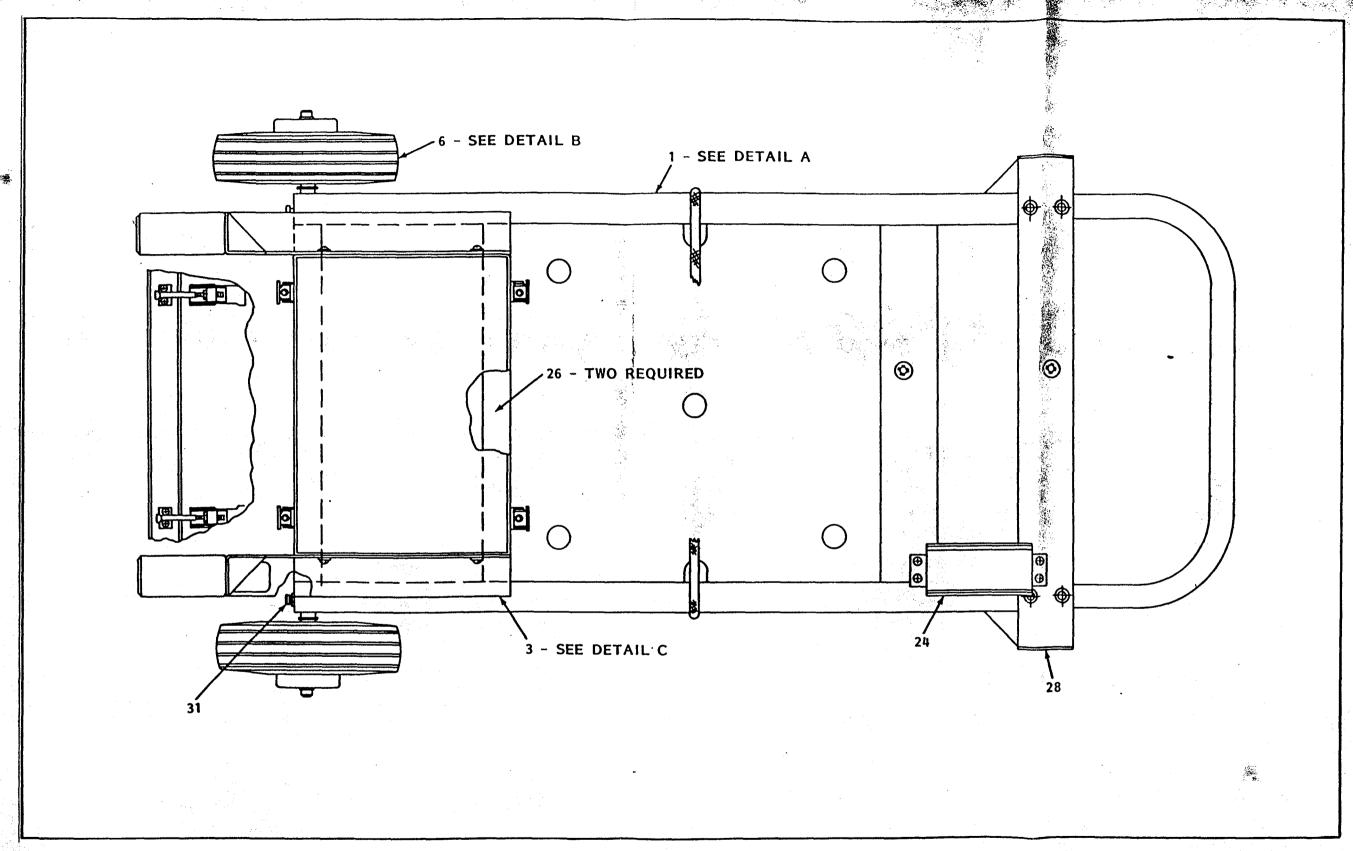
Base Assembly, Top View, Location of Components (Sheet 1 of 5)
